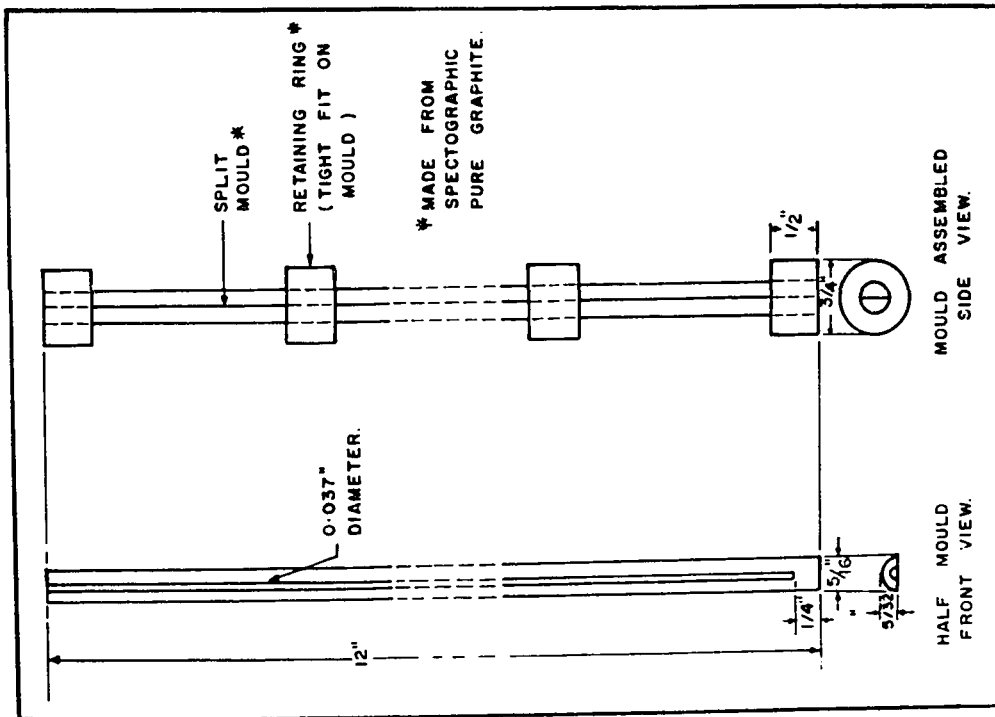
DESIGN OF SPLIT GRAPHITE MOULD FOR GROWING SINGLE CRYSTAL WIRES
